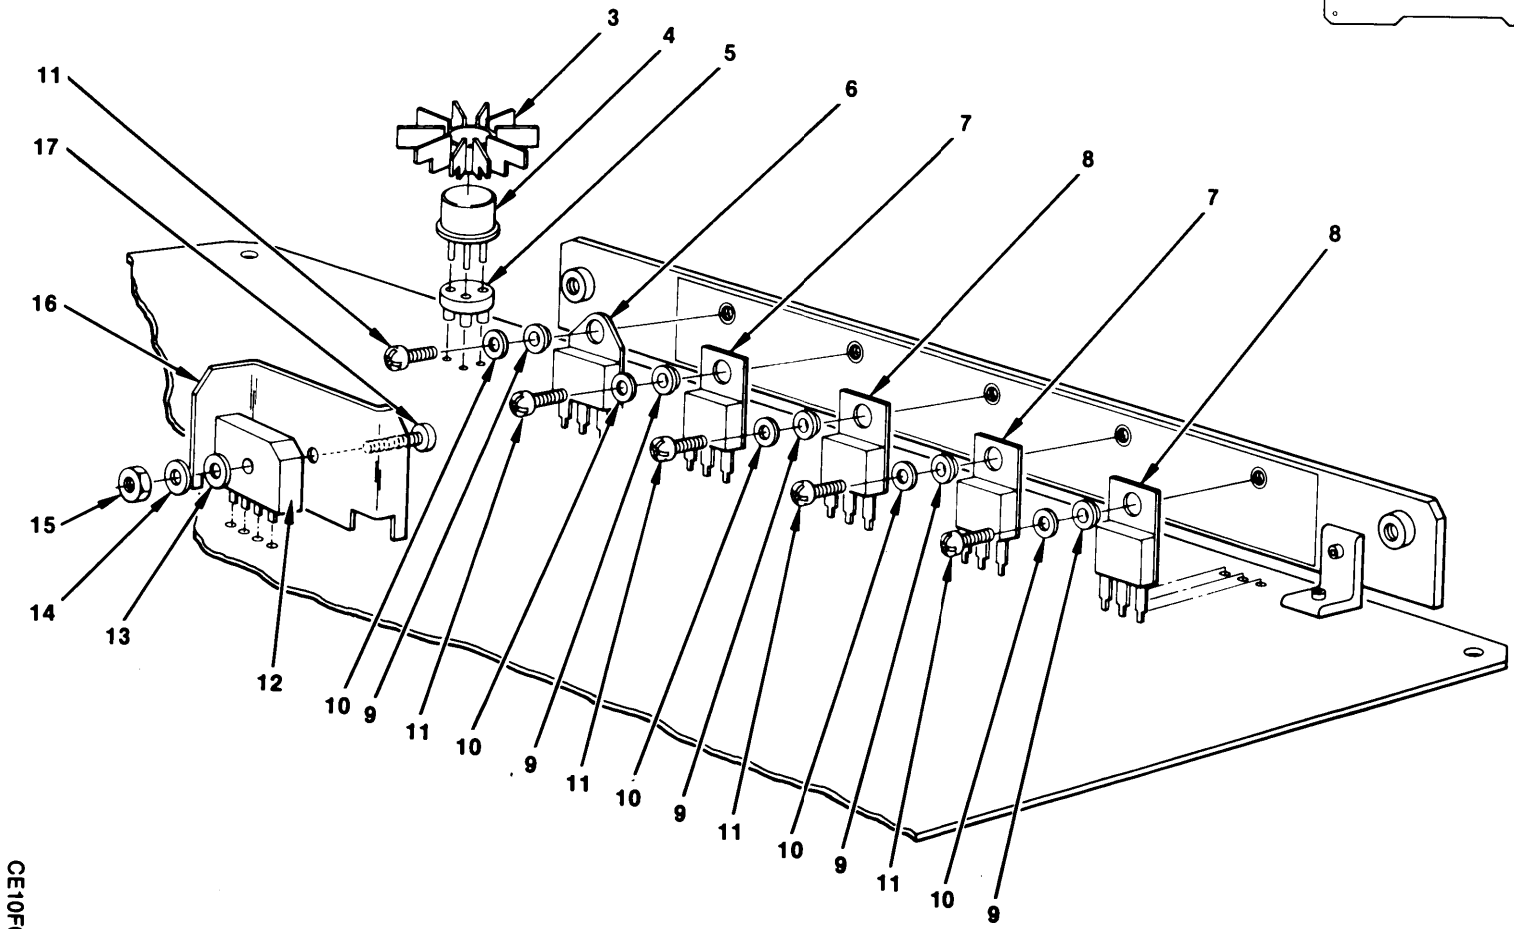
Mother Board Assembly (Sheet 1 of 2)
